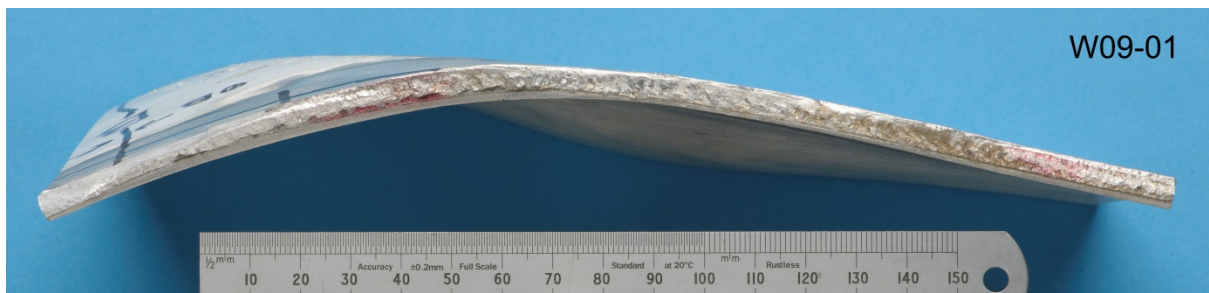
J2580 sample W09-01 fracture surface.
